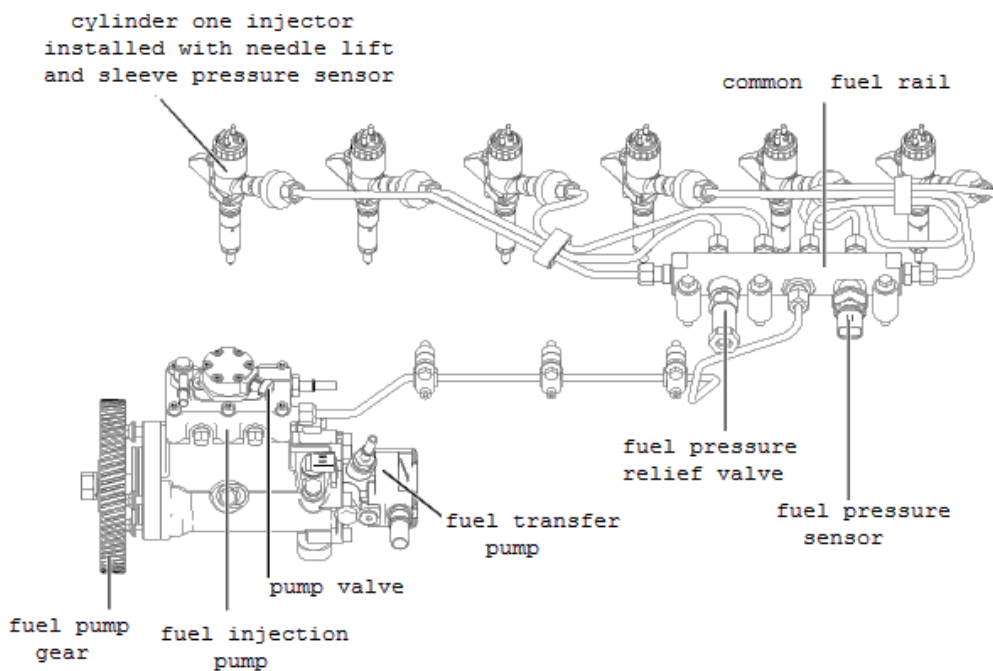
C6.6 Engine Fuel-Path System (High Pressure Part) (Reproduced from [172])
